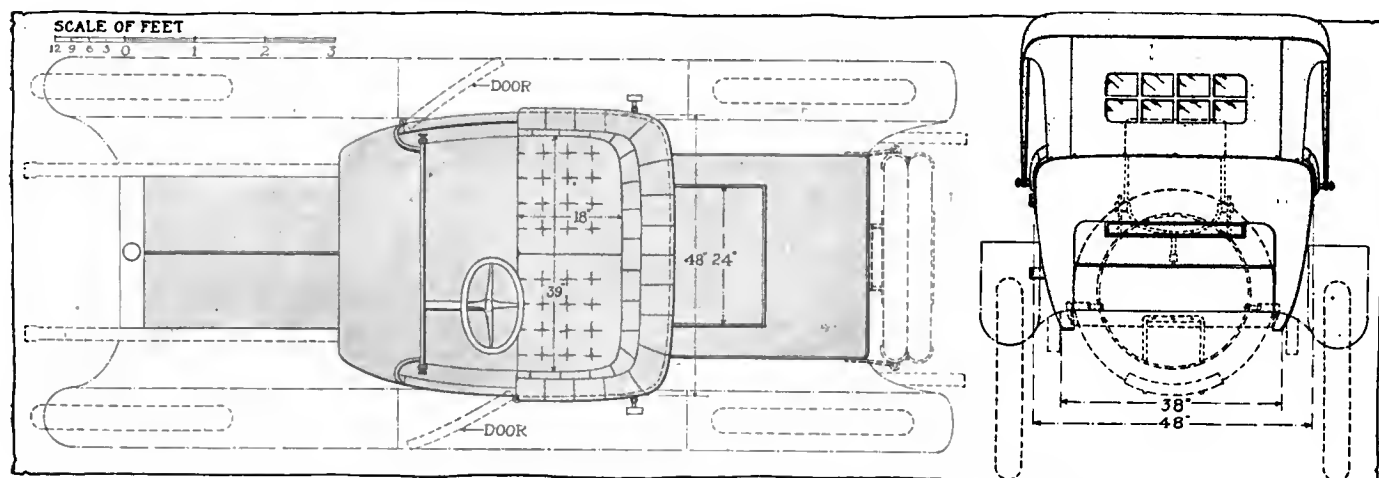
Plan and rear view, showing method of ventilating interior by arrangement of doors
